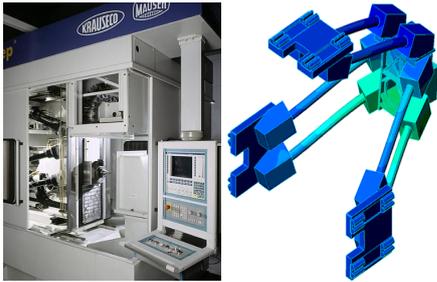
The Quickstep 3-axis machining center and Quickstep's kinematic structure [58]
